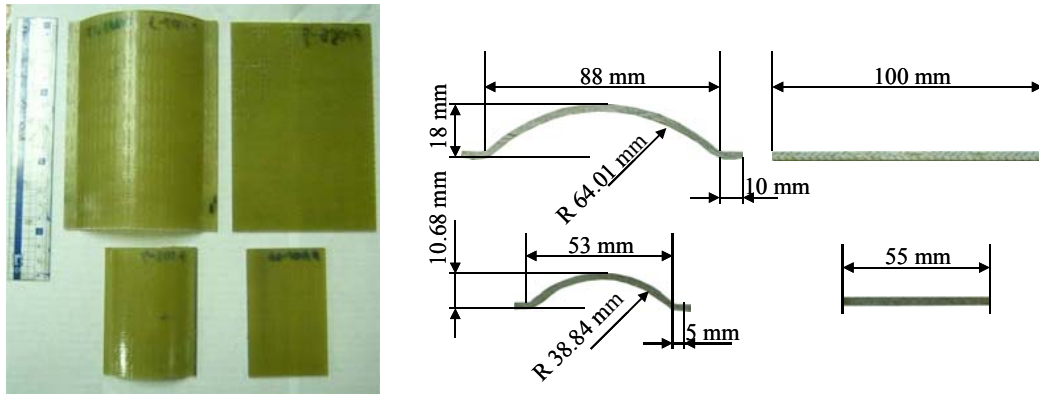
Test specimens and their respective dimensions in the horizontal plane.
